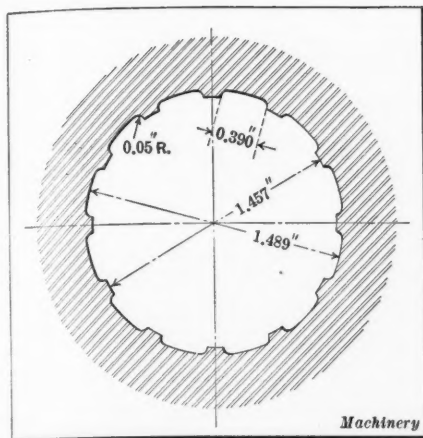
Section of Gun-barrel which has Twelve Right-hand Spiral Grooves of Uniform Twist making One Turn in Forty Inches
